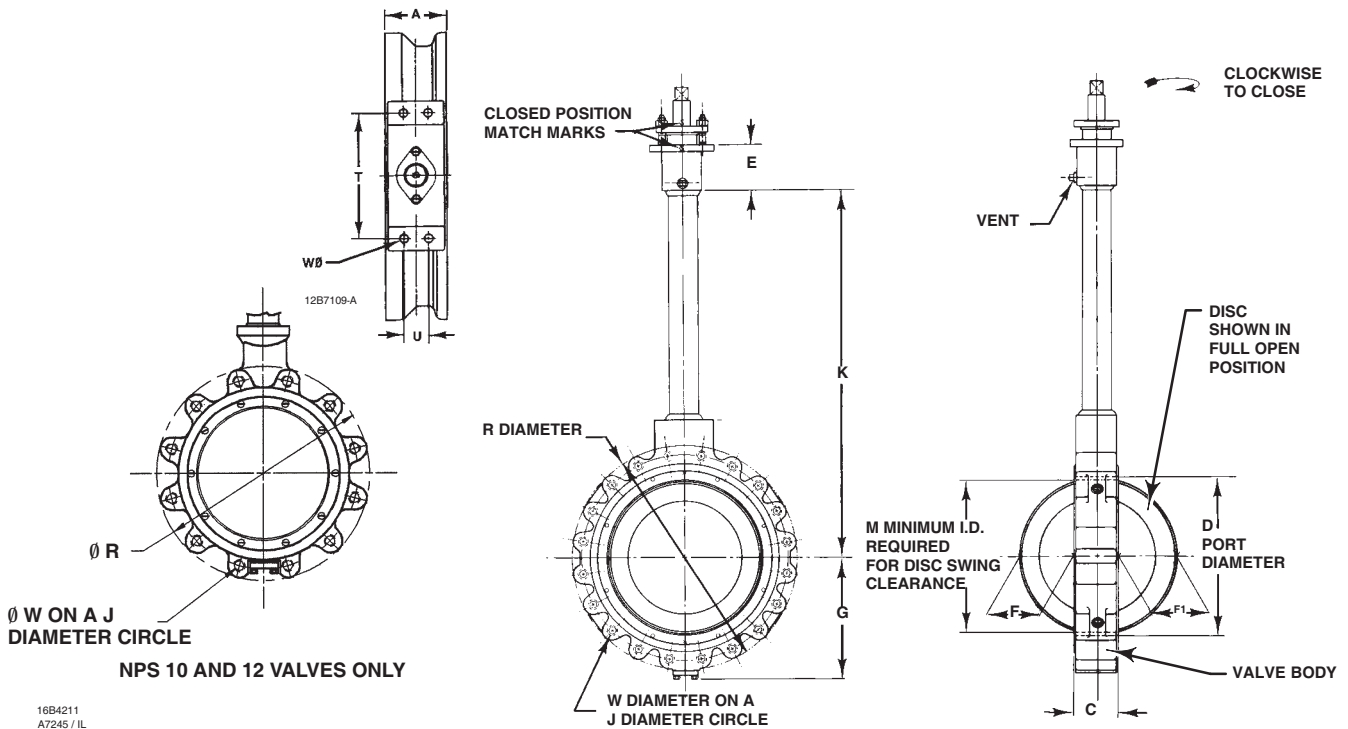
Dimensions, Single Flange Style Valve, CL150, NPS 10 through 24 (see also table 8)
